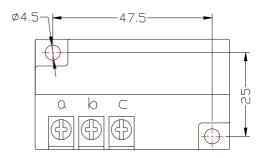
、Structural dimension of CT1 (φ36 hole)
